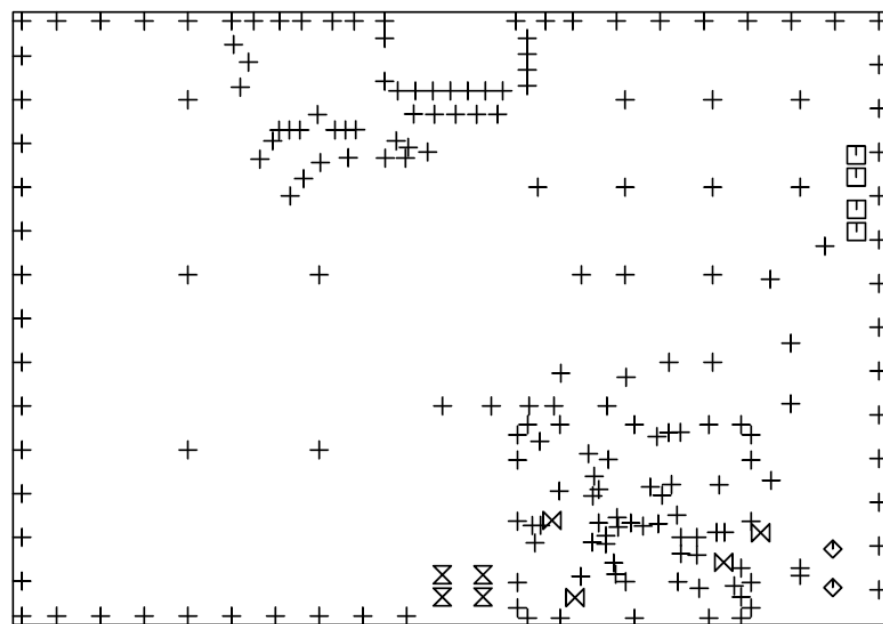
Example of drill drawing, top side. Note multiple GND via holes at the ground plane and at the perimeter of the PCB.
